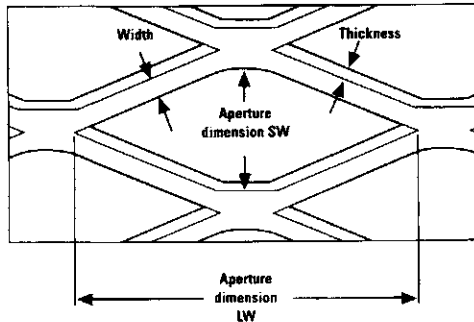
Defining the dimensions of expanded metal meshes. (Illustration: The Expanded Metal Co. Ltd.)
